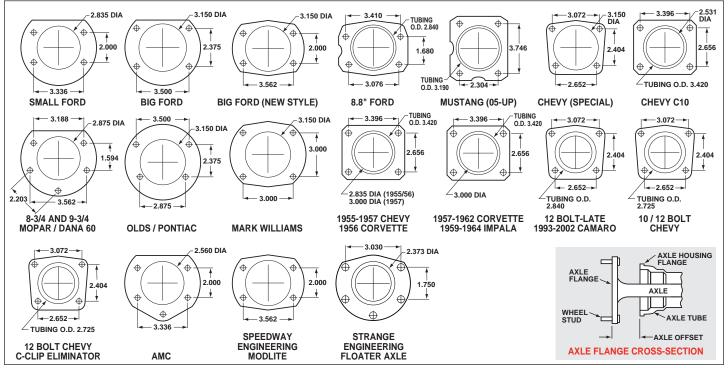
Rear Housing Flange Chart and Axle Flange / Offset Cross-Section
